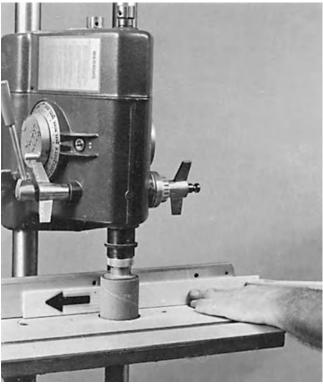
This is about the only way you can surface sand thin slats so all will be of equal thickness throughout their lengths.
